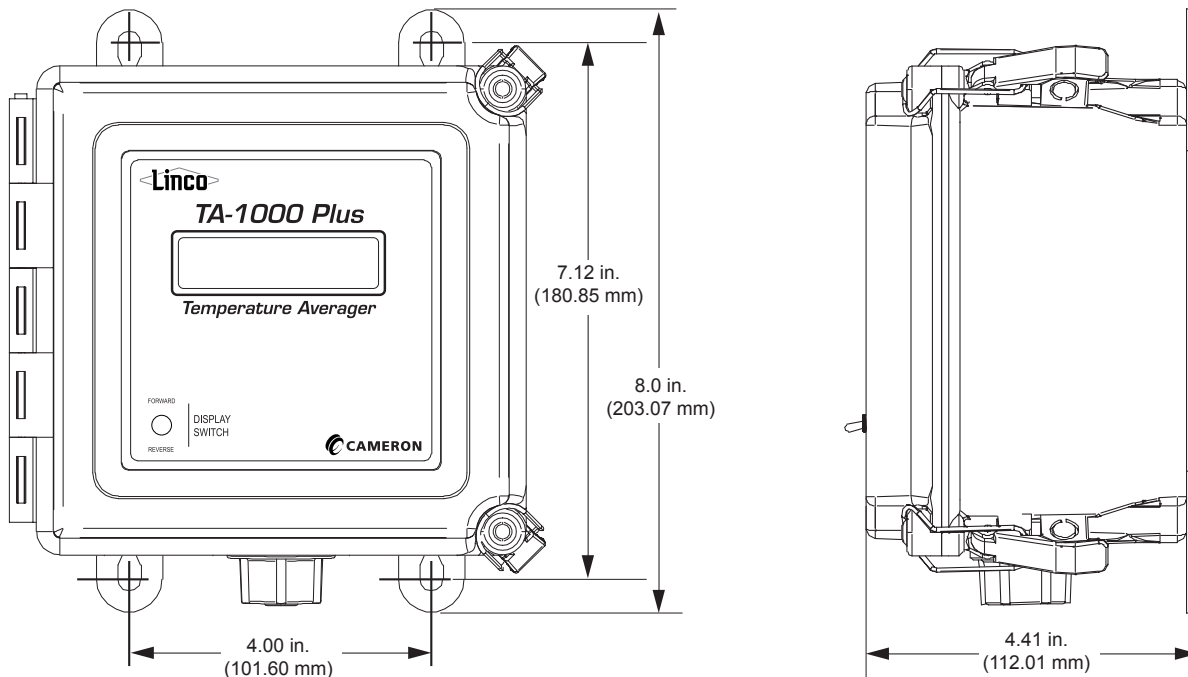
Typical dimensions for panel-mount installation, weatherproof package (two outside conduit hubs hidden in this view)
